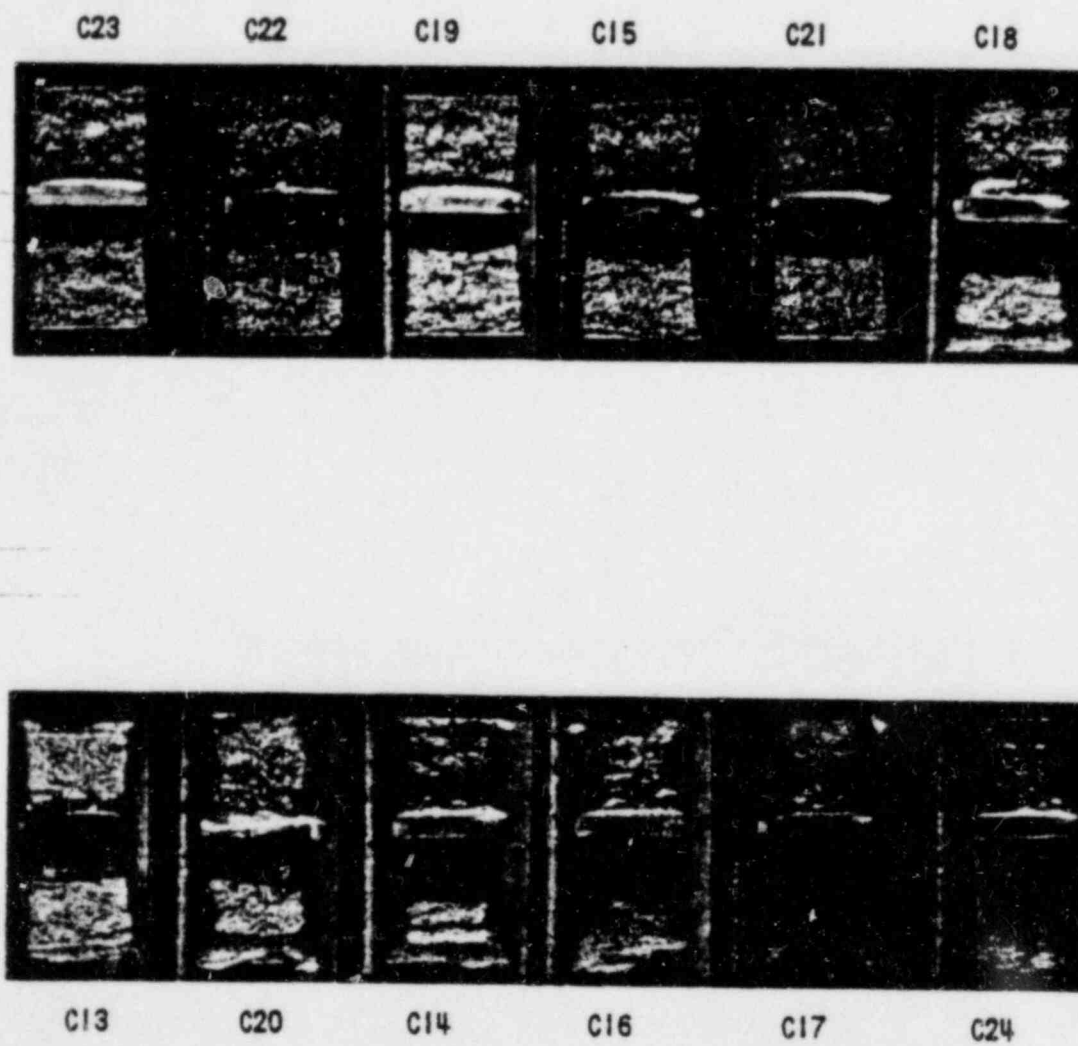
Charpy Impact Specimen Fracture Surfaces for Point Beach Unit No. 1 Pressure Vessel Shell Plate C1423
